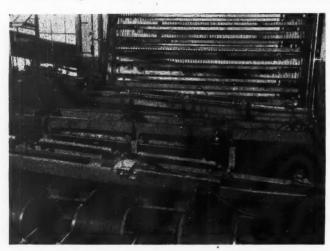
Elevator type conveyor designed to carry bar stock from first to second floor. BOYAR-SCHULTZ PROFILE GRINDERS
